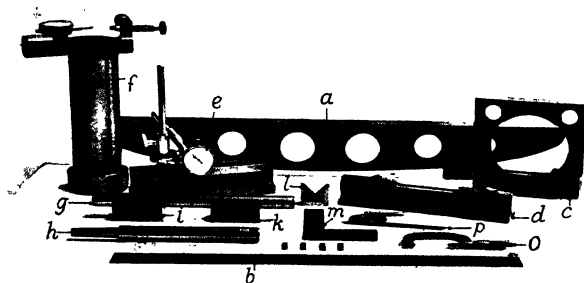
INSPECTION TOOLS FOR MAINTENANCE AND REPAIR
